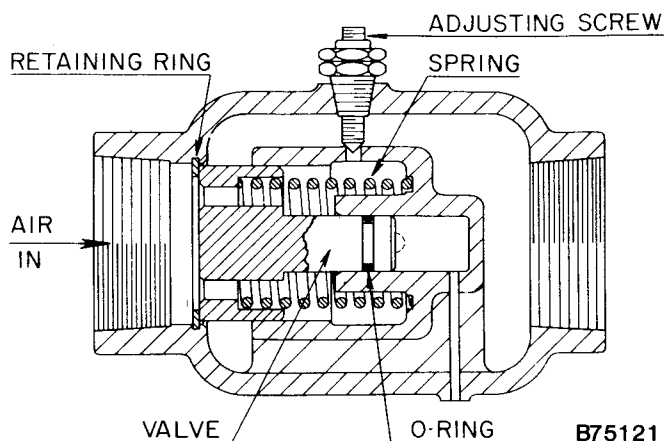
MINIMUM DISCHARGE PRESSURE VALVE
